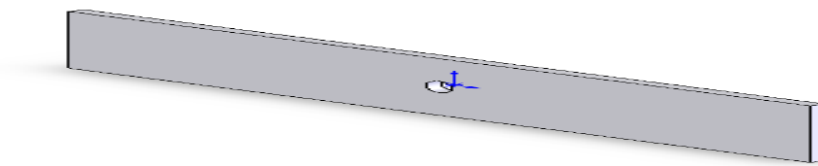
Geometry of plate hole with suitable dimensions in Solid works
